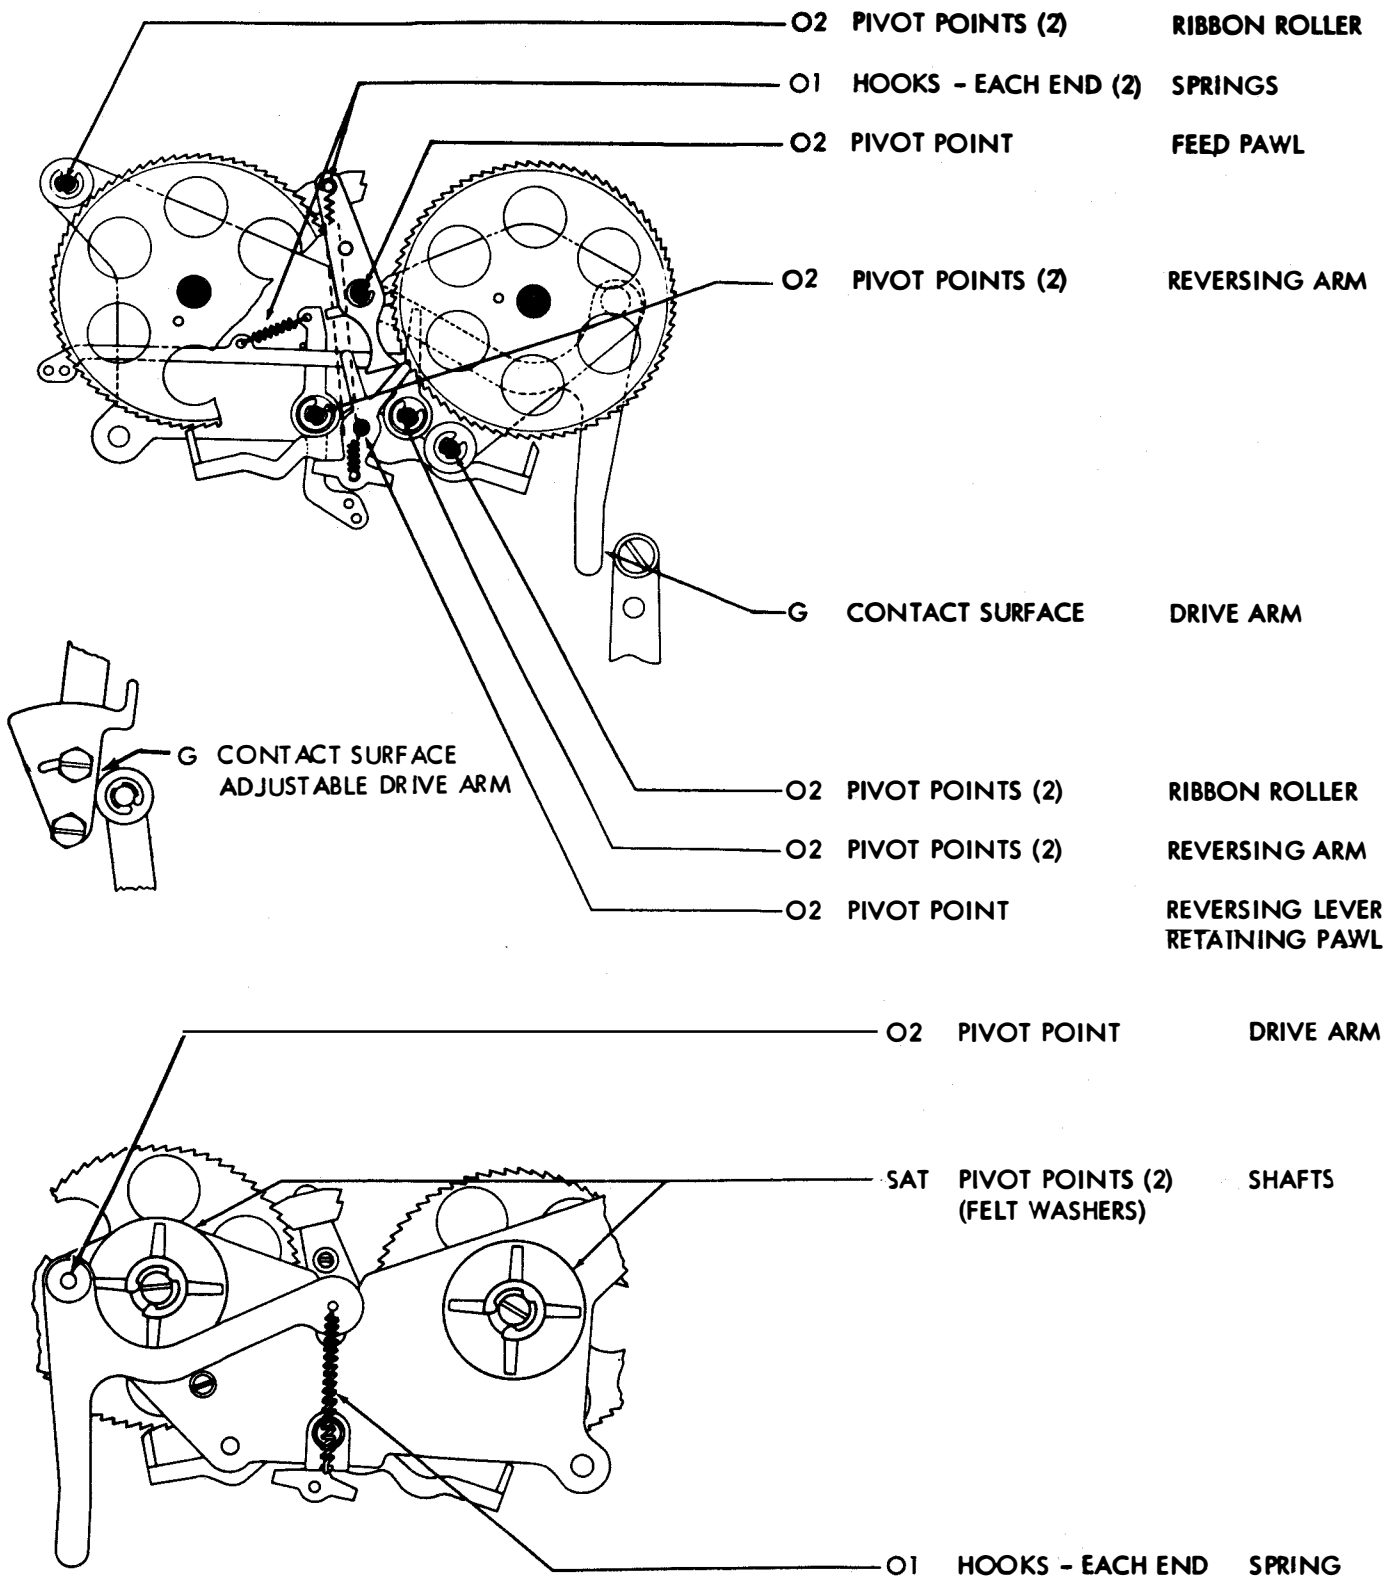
Ribbon-Feed Mechanism (Earlier Design)
